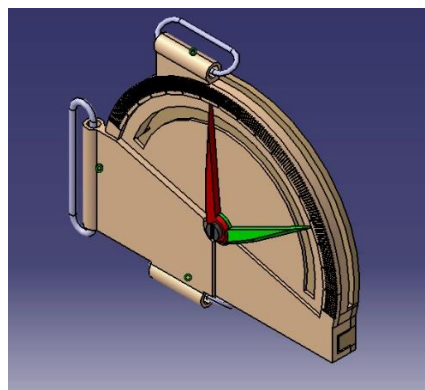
Angle Measurement and Calibration Sub assembly.
